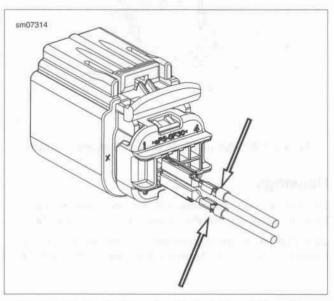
Socket Terminal Orientation: Crimp Open Side
